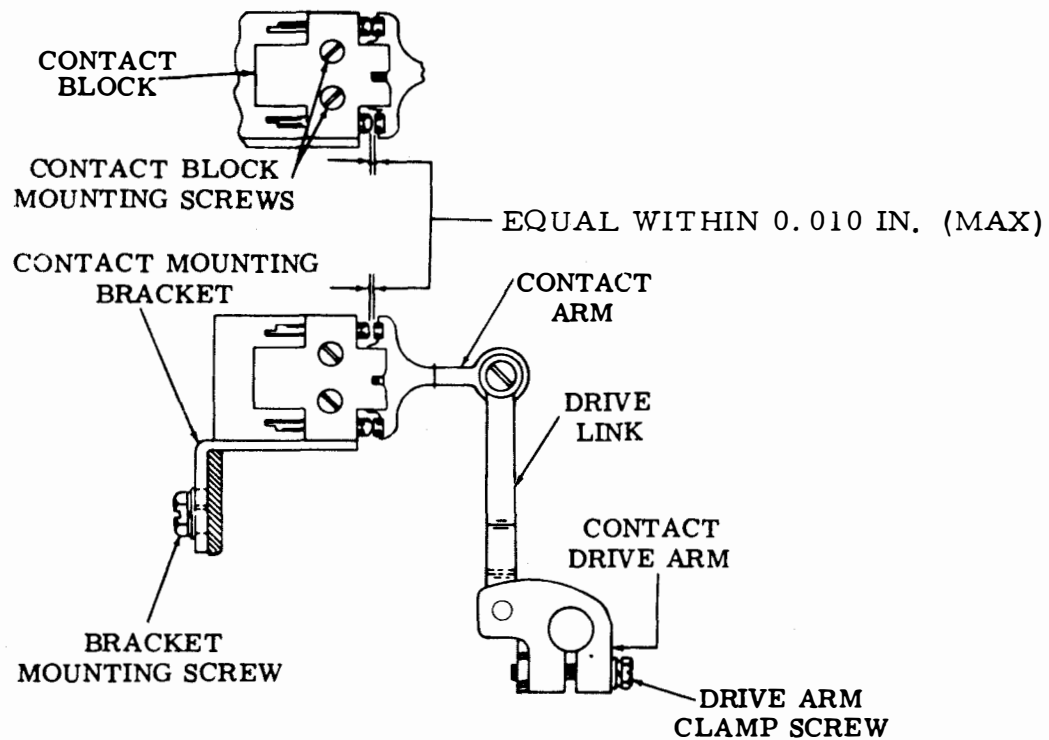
Contact Mounting Bracket, Contact Block, and Contact Drive Arm Position, Right Side View
